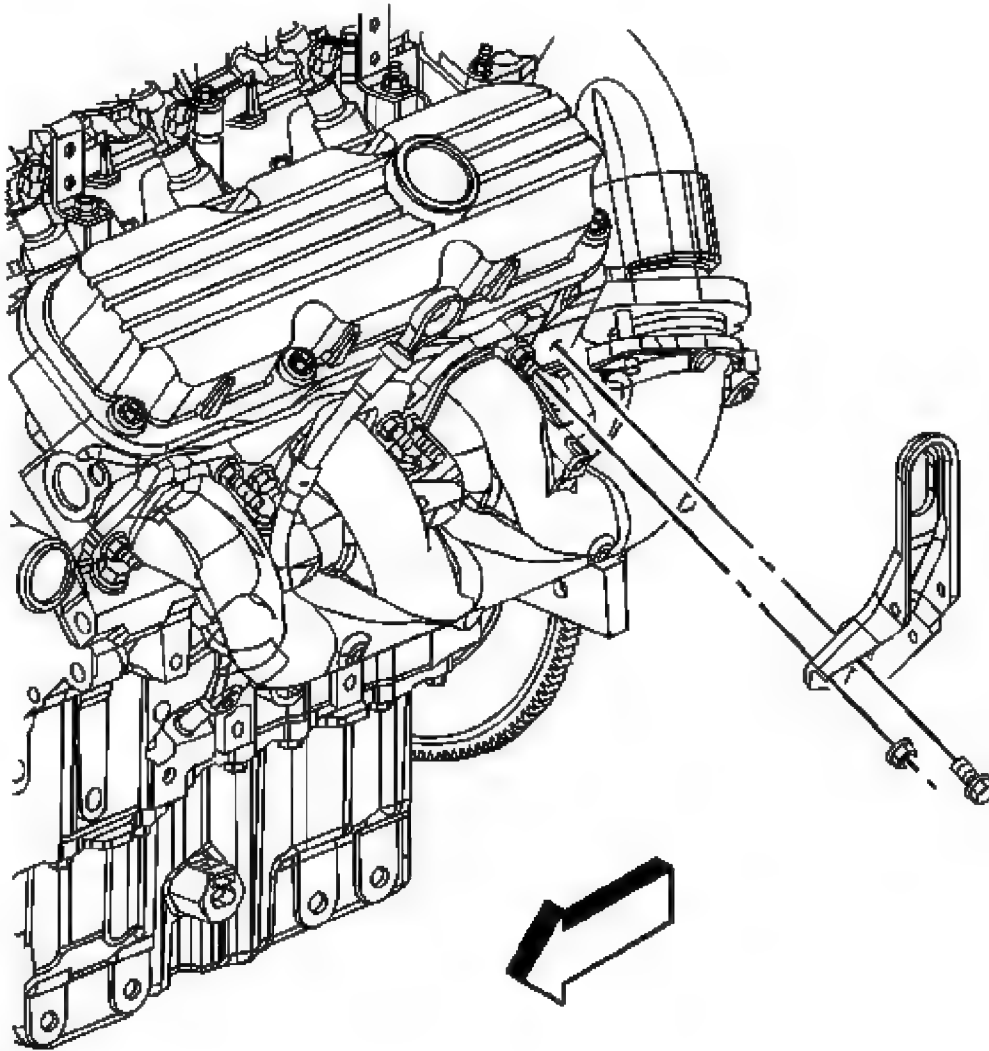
Identifying Engine Lift Bracket Bolt & Nut
